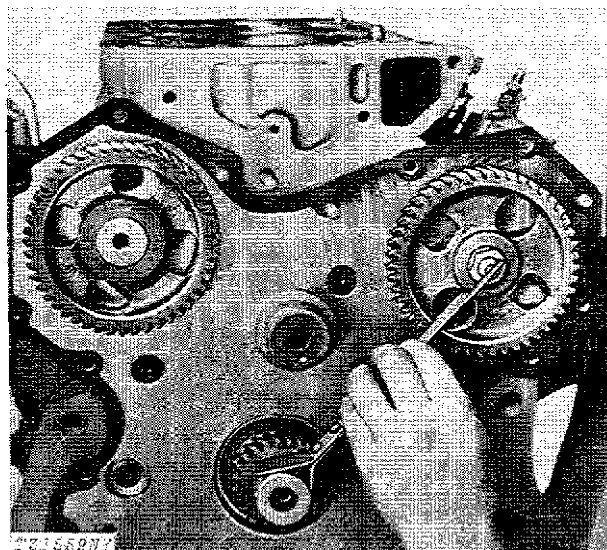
Timing the Injection Pump Gear With JD254 Tool
